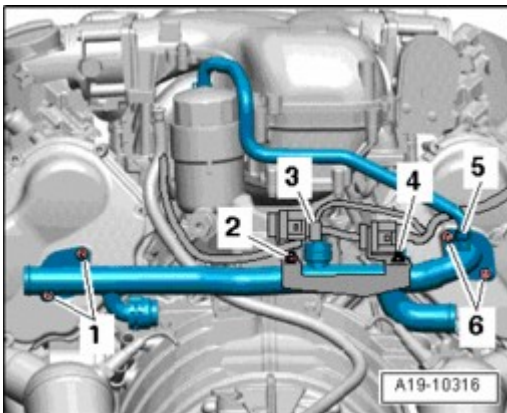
Identifying Nuts, Bolts, Electrical Connector On Engine Coolant Temperature (ECT) Sensor G62 & Coolant Hose
